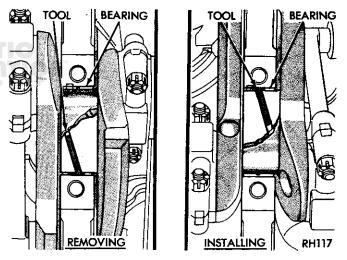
Removing and Installing Upper Main Bearing with Tool C-3059
